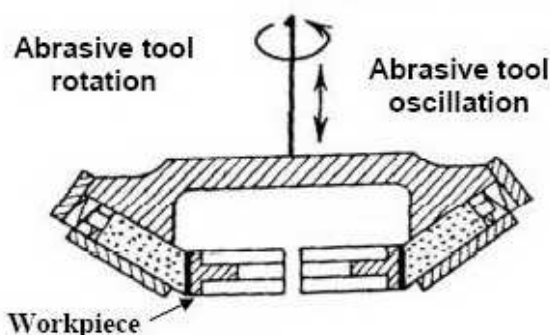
Abrasive tool rotating and oscillating about a stationary work piece
